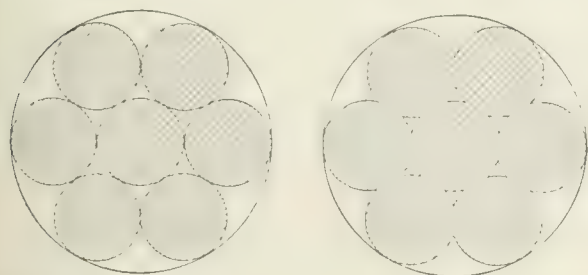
Experiments in Welding Round Steel Bars Tied with Wire and Dropped in Molten Slag.
